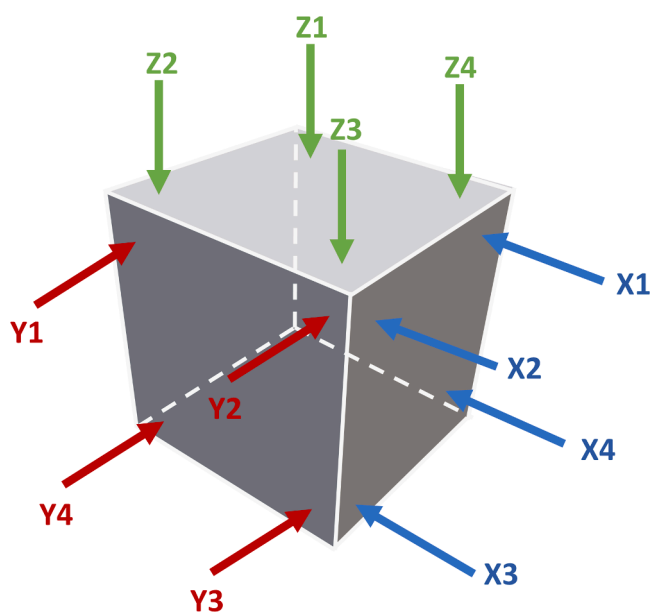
Schematic representation of the test specimen indicating the twelve standardized reference points used for dimensional measurement.
